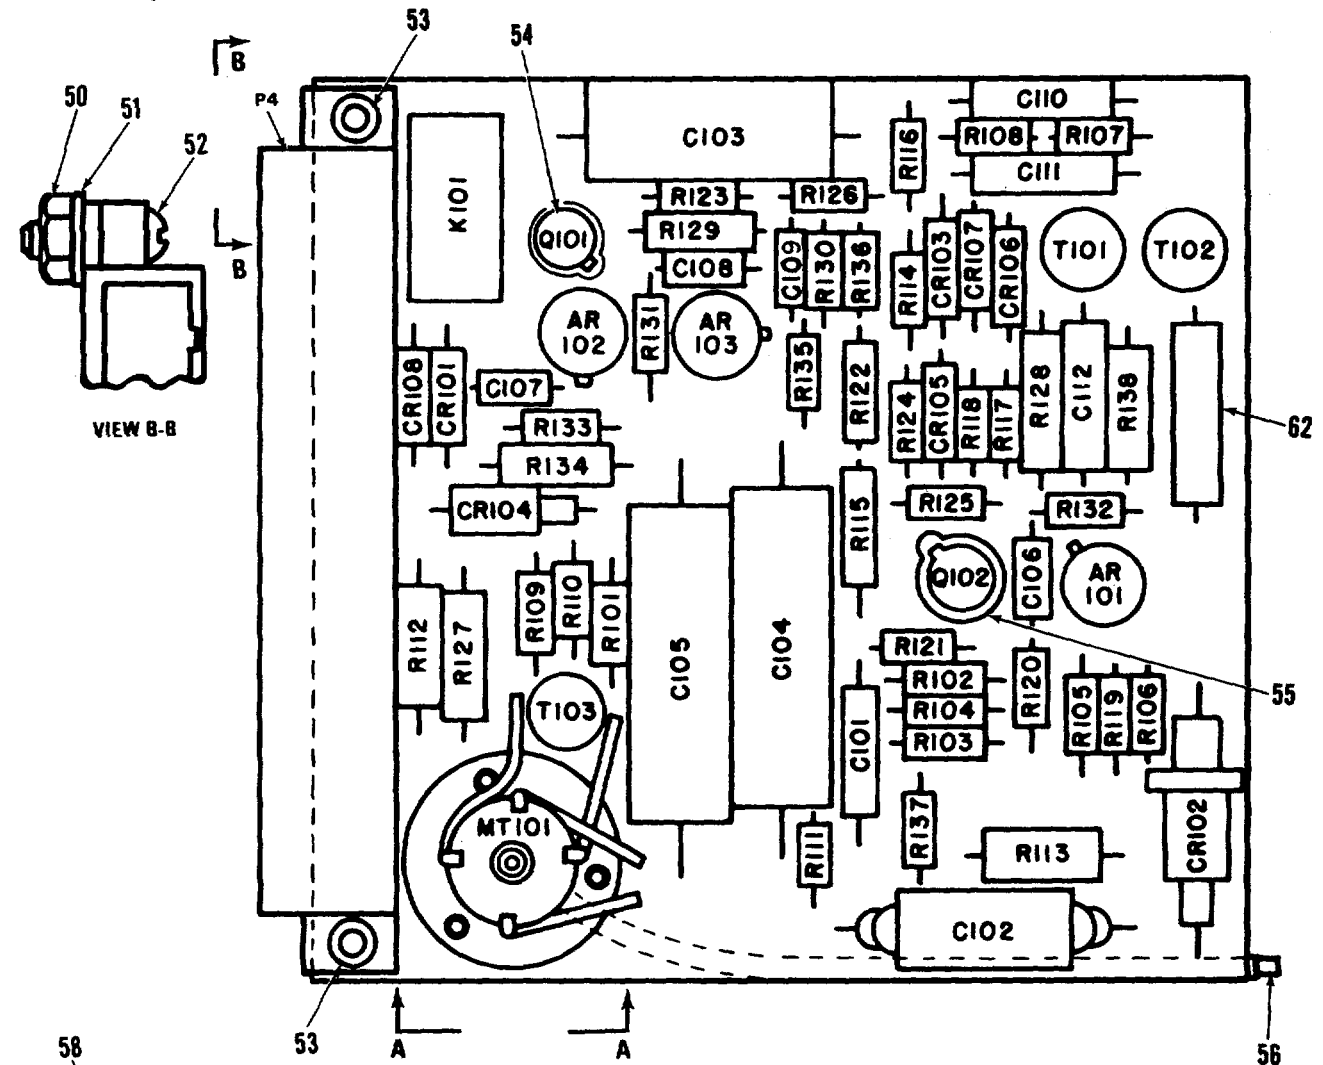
Calibration Component Assembly 114V4000-1, -2, -3, -4 (Sheet 3 of 3).
